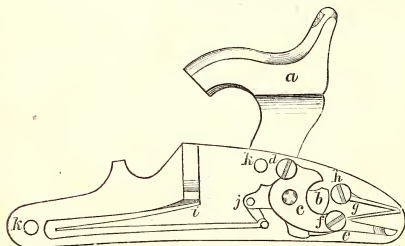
Lock, inside view, half size, showing the parts at half-cock.
